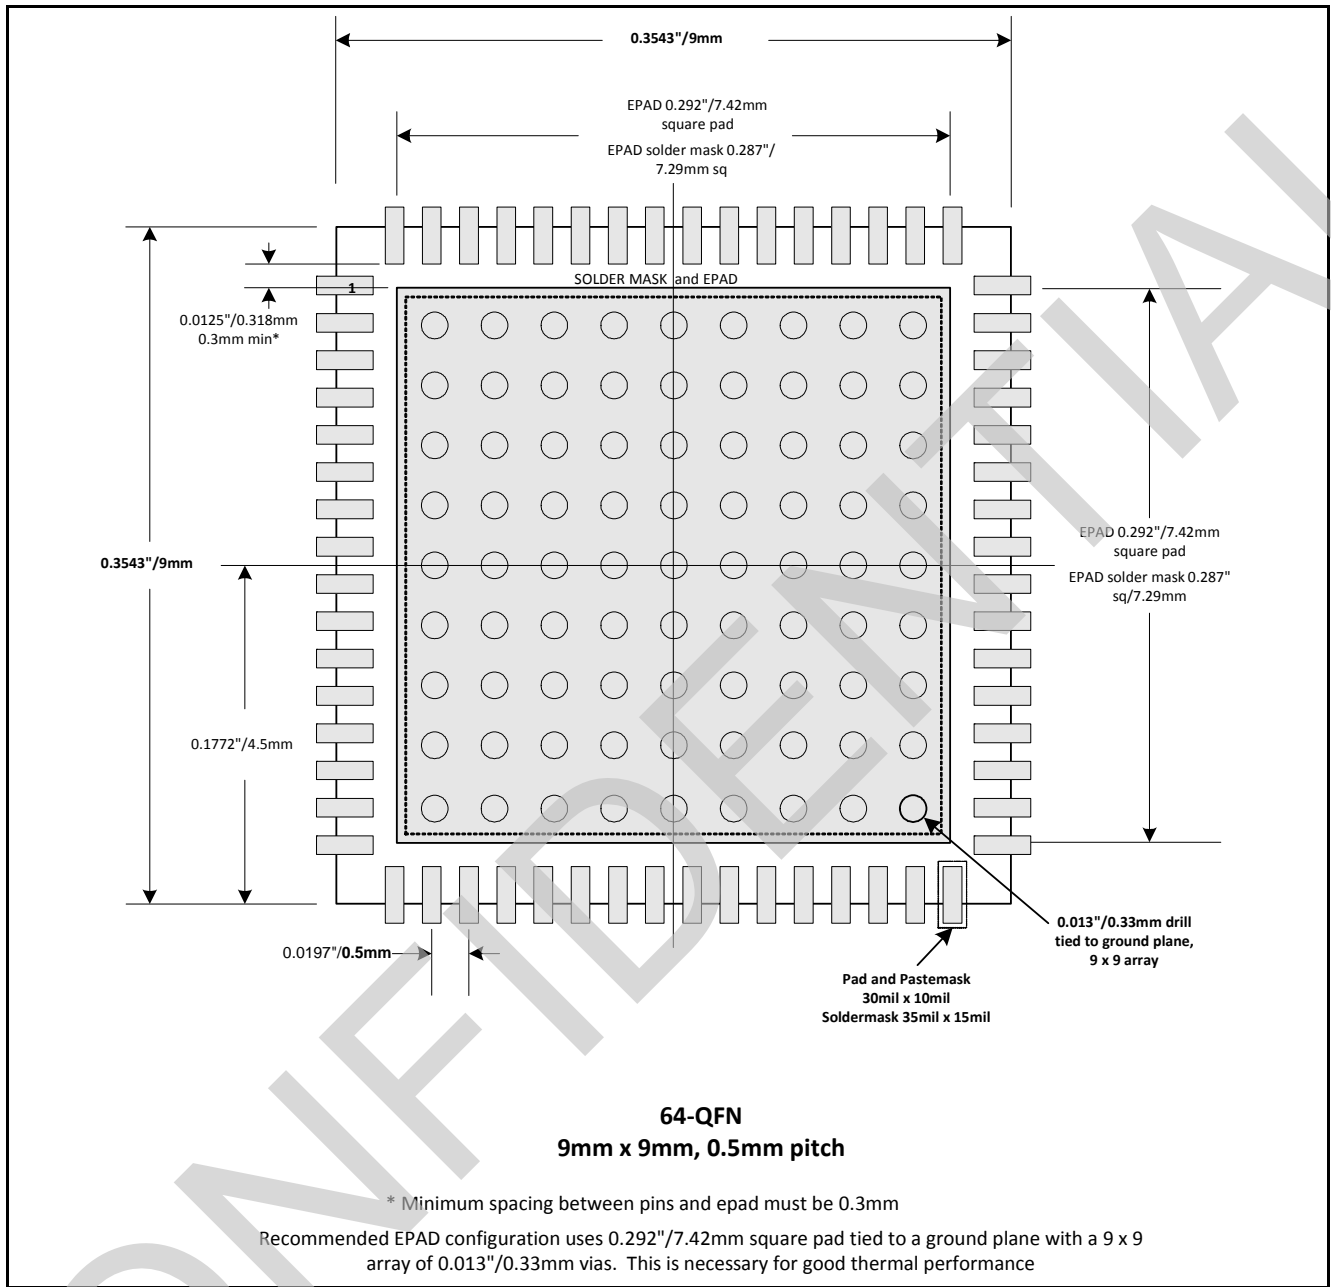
Recommended Land Pattern (QFN-64) - Top View
